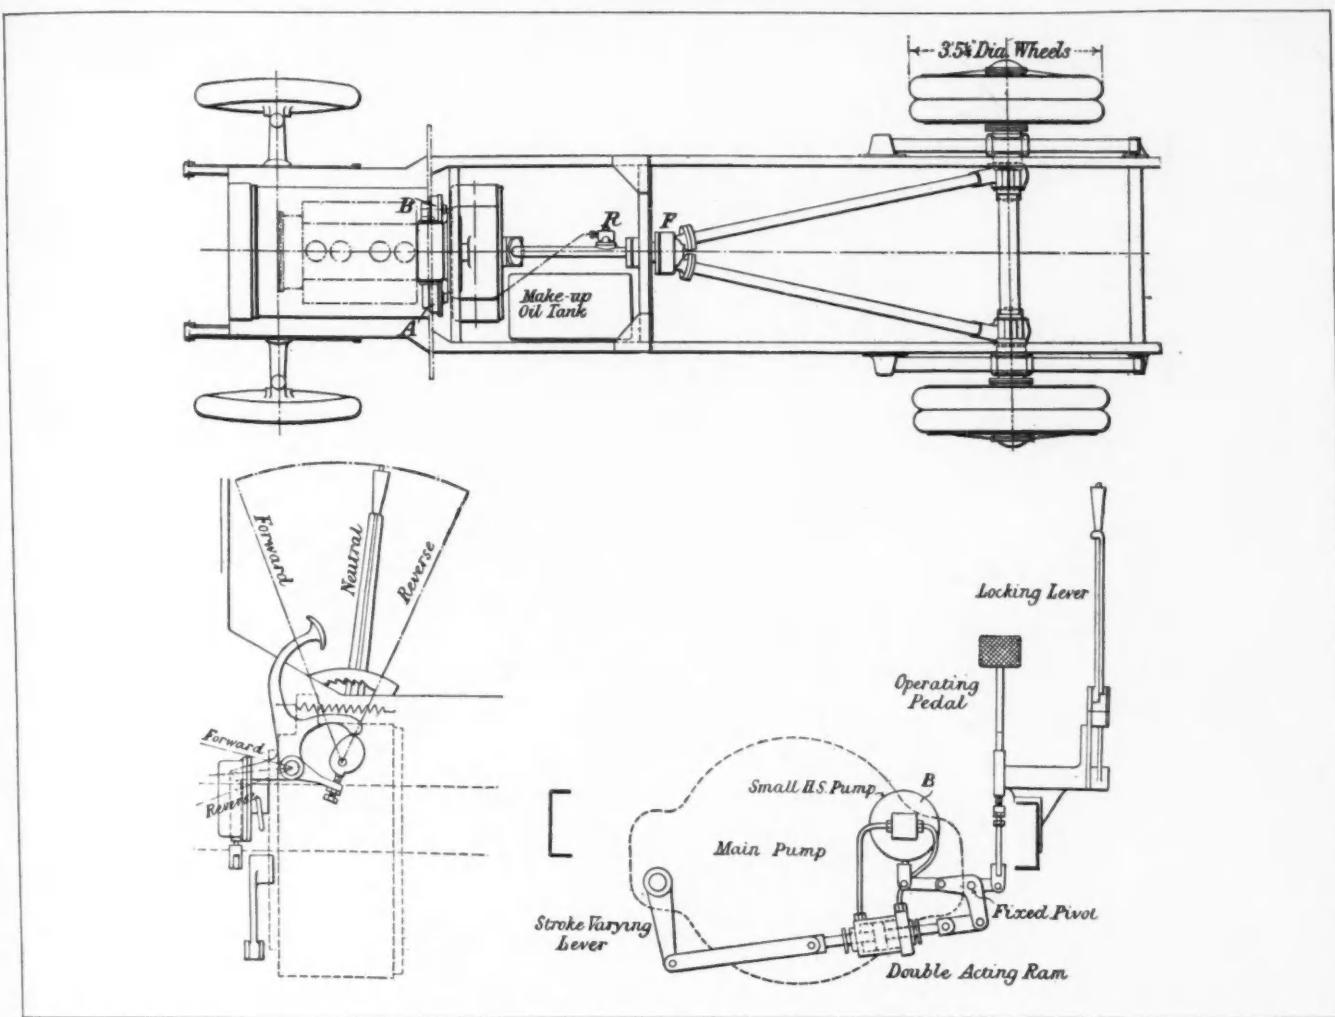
Variable-Stroke Displacement-Pump of the Hele-Shaw Hydraulic Drive
